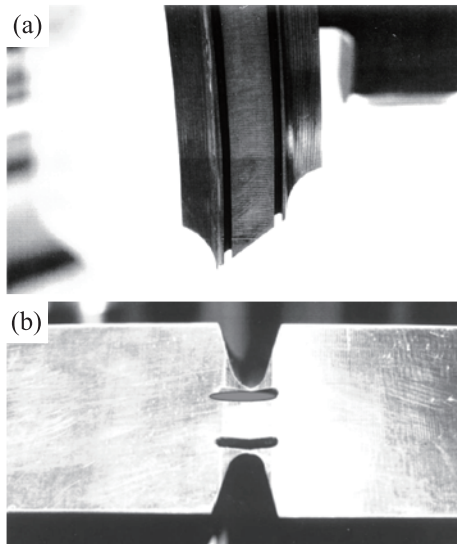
Weld grooves of butt joint of support structure on equator (a), and butt joint on horizontal port (b).
